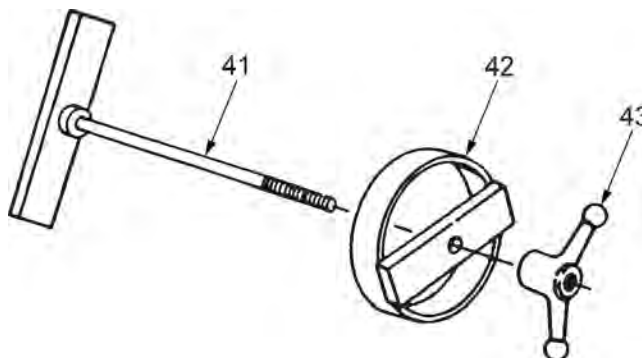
Bar and Stud Assembly for Retaining Ring Removal.
